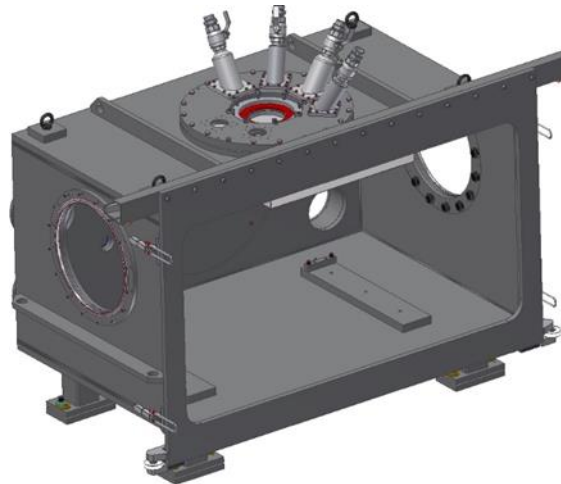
An example of the design of the welding chamber of a highly productive welding machine
